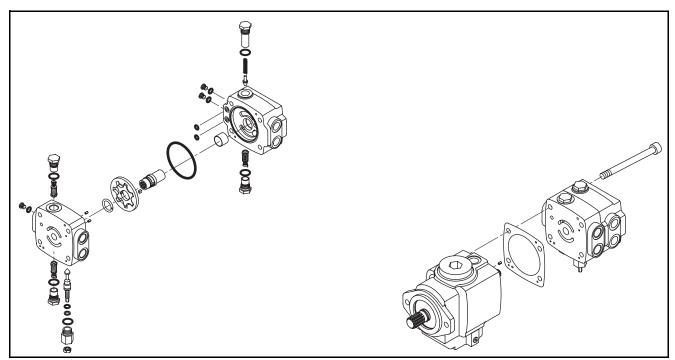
D-12. Valve Plate, Gerotor Pump, and Rear Plate Assembly
